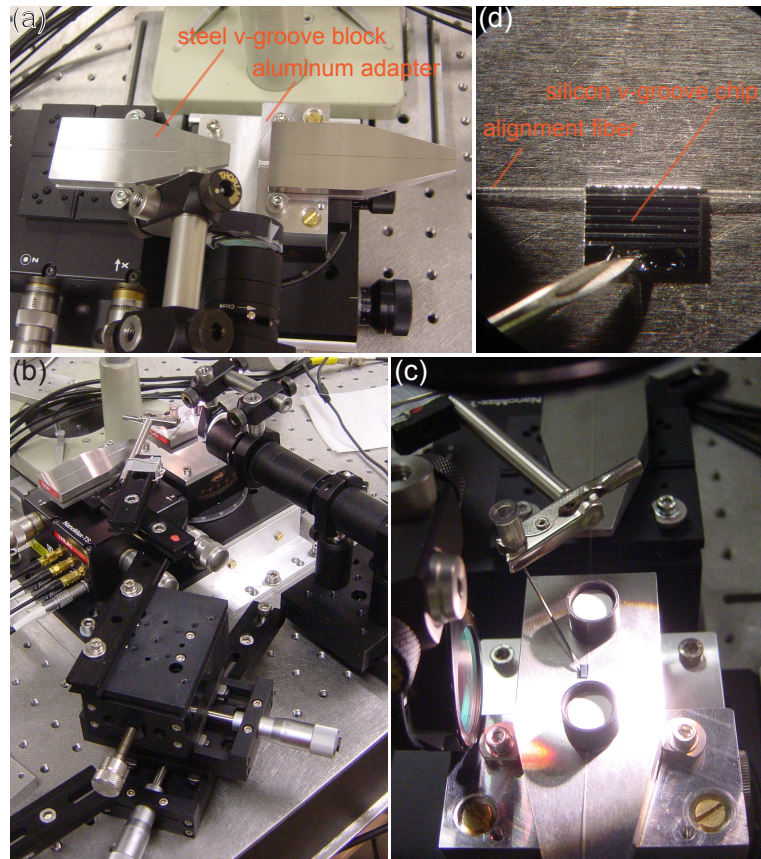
(a) Steel blocks with aligned top surfaces and v-grooves. (b) Installed xyz-manipulator with needle clamped at the end of its lever arm. (c) Close-up of the needle in contact with the aligned silicon v-groove chip and (d) stuck together as seen through the microscope.
